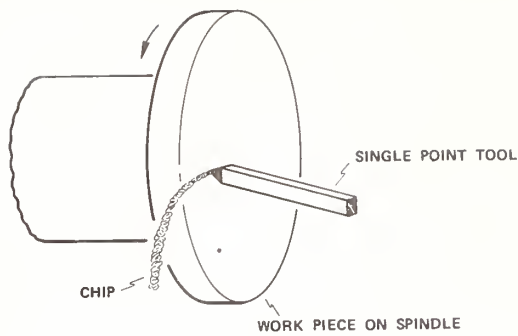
(a). A schematic of the single-point tool machining process showing a part mounted on a rotating spindle being worked by a tool which is mounted on a slide mechanism capable of moving the tool over a controlled path in two dimensions.
